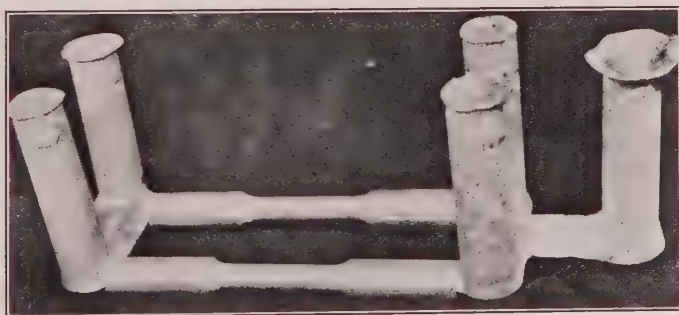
METHOD OF CASTING TEST BARS IN SAND.
